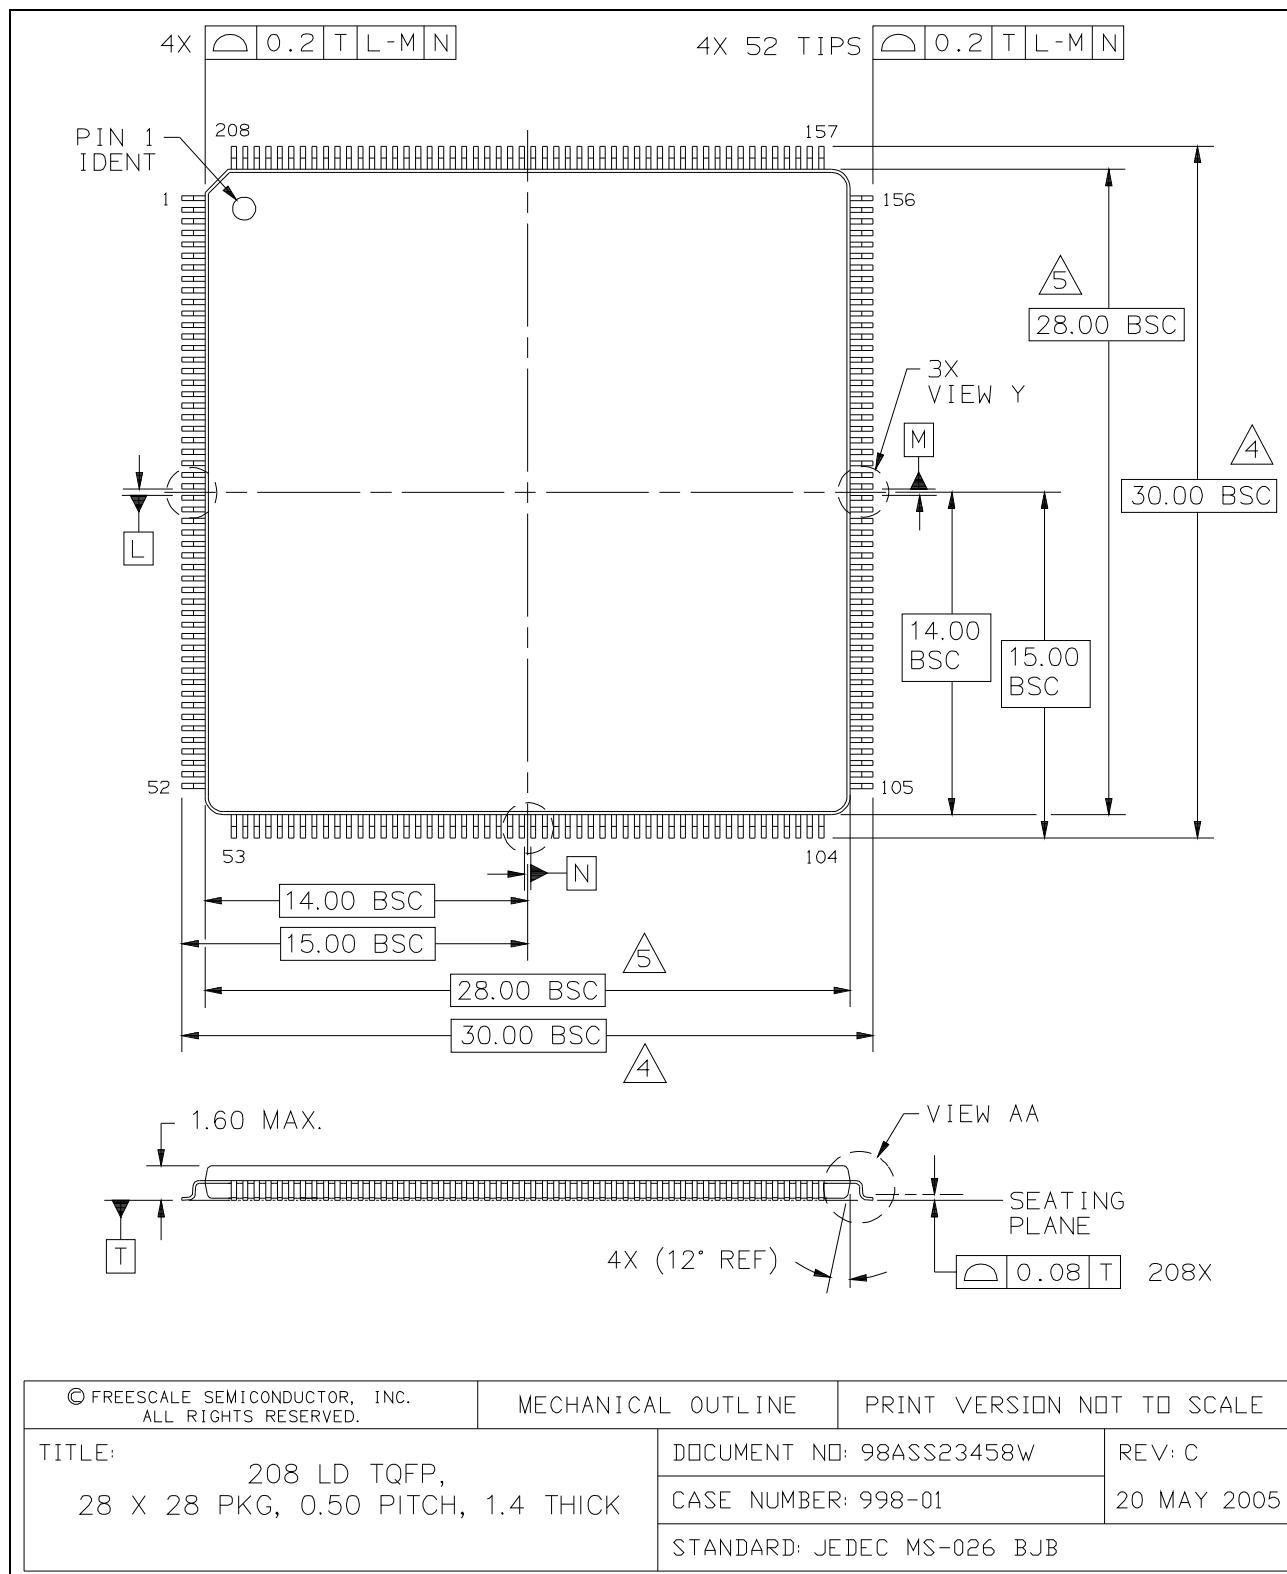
208 LQFP mechanical drawing (Part 1 of 3)
